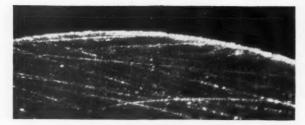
X100. Photomicrograph of carbide tool point lapped with fine grit diamond wheel. Note absolute regularity of cutting edge, which will result in longer tool life, better finish and higher accuracy.
